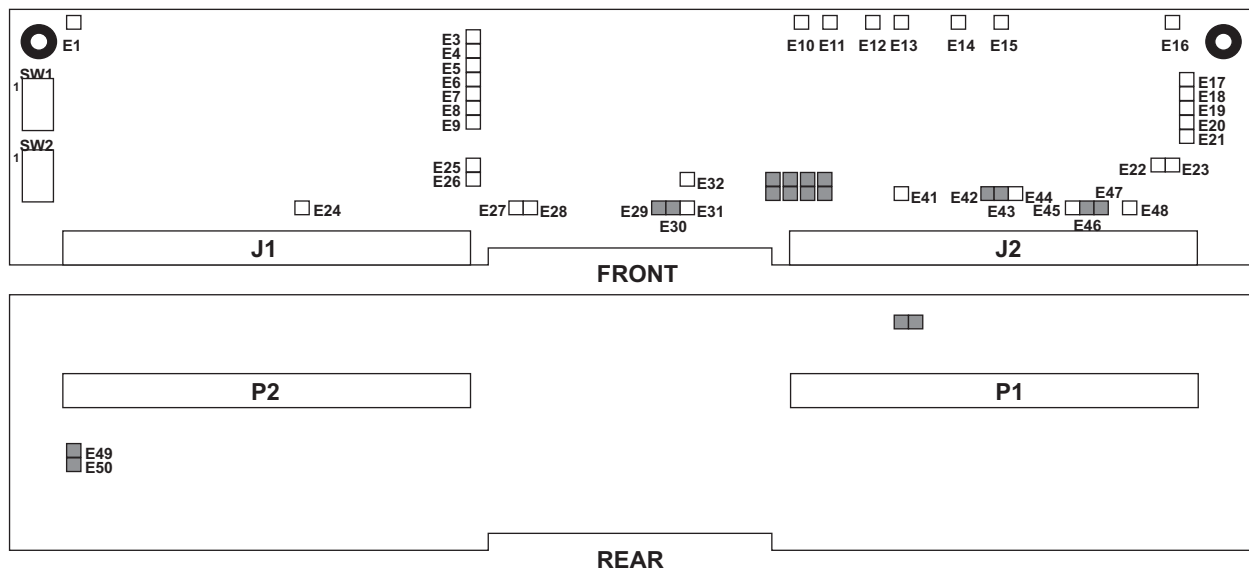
SR192 CPU Module Test Points, Jumpers and Switch Location
